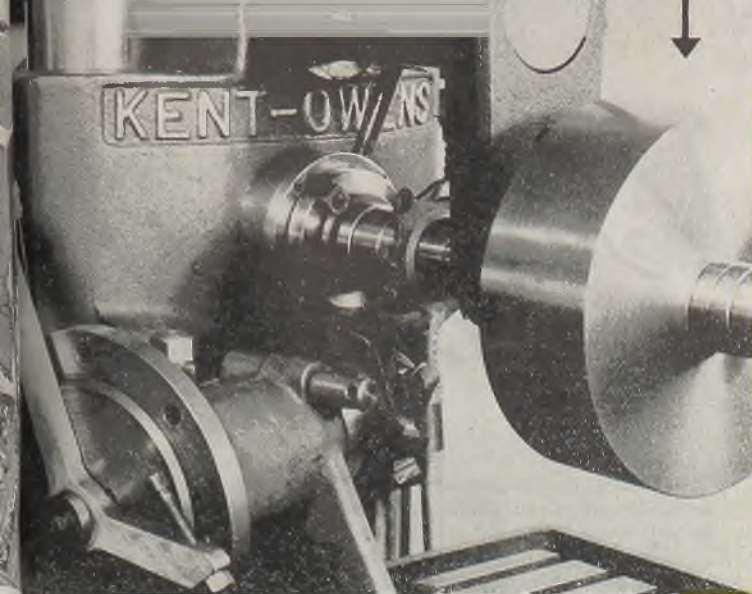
(Extreme left)—This is an early and interesting example of the use of a flywheel to smooth out what ordinarily would be a "bumpy" hobbing operation involving the use of a single tooth hob of flycutter type. Photo courtesy Braun Gear Corp.
